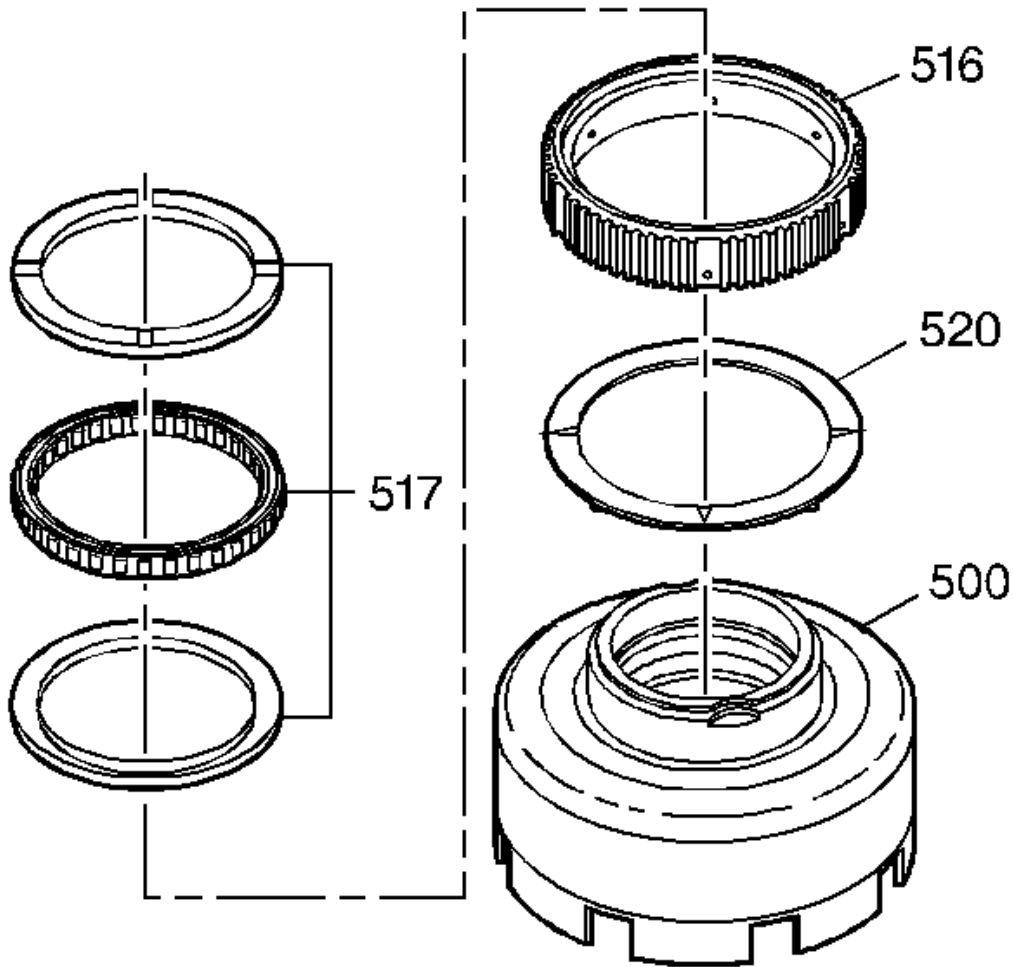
Identifying 2nd Sprag Race & Clutch Assembly
